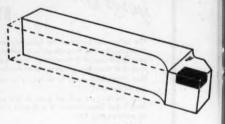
Drawing of Steel Shank for Offset Carboloy-Tipped Tool
